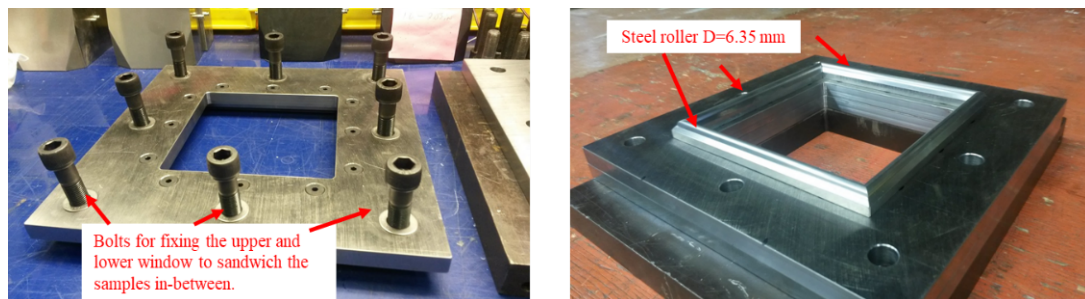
The LVI fixture used for 177.8 mm × 177.8 mm samples.
